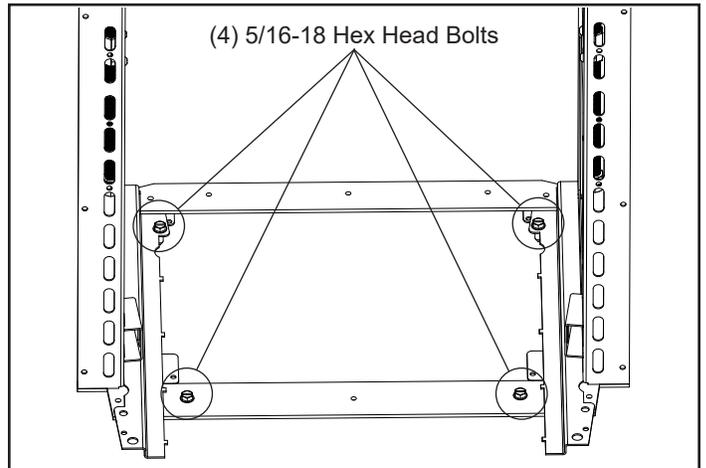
Remove (4) 5/16-18 Hex Head Bolts
